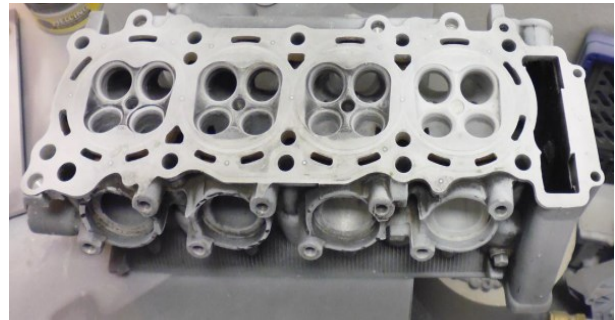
Sticking uncoded measurement points on the cylinder head
